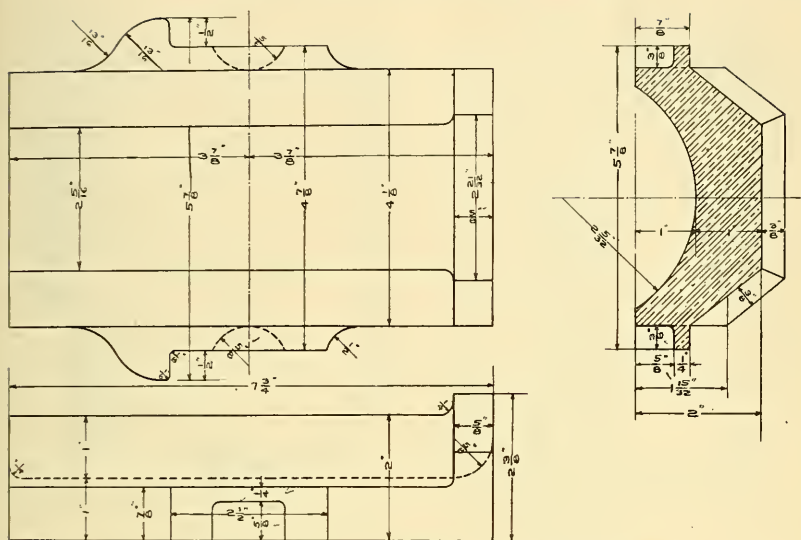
4 1/4 x 8 Journal Bearing for Cars of 30 Tons.
